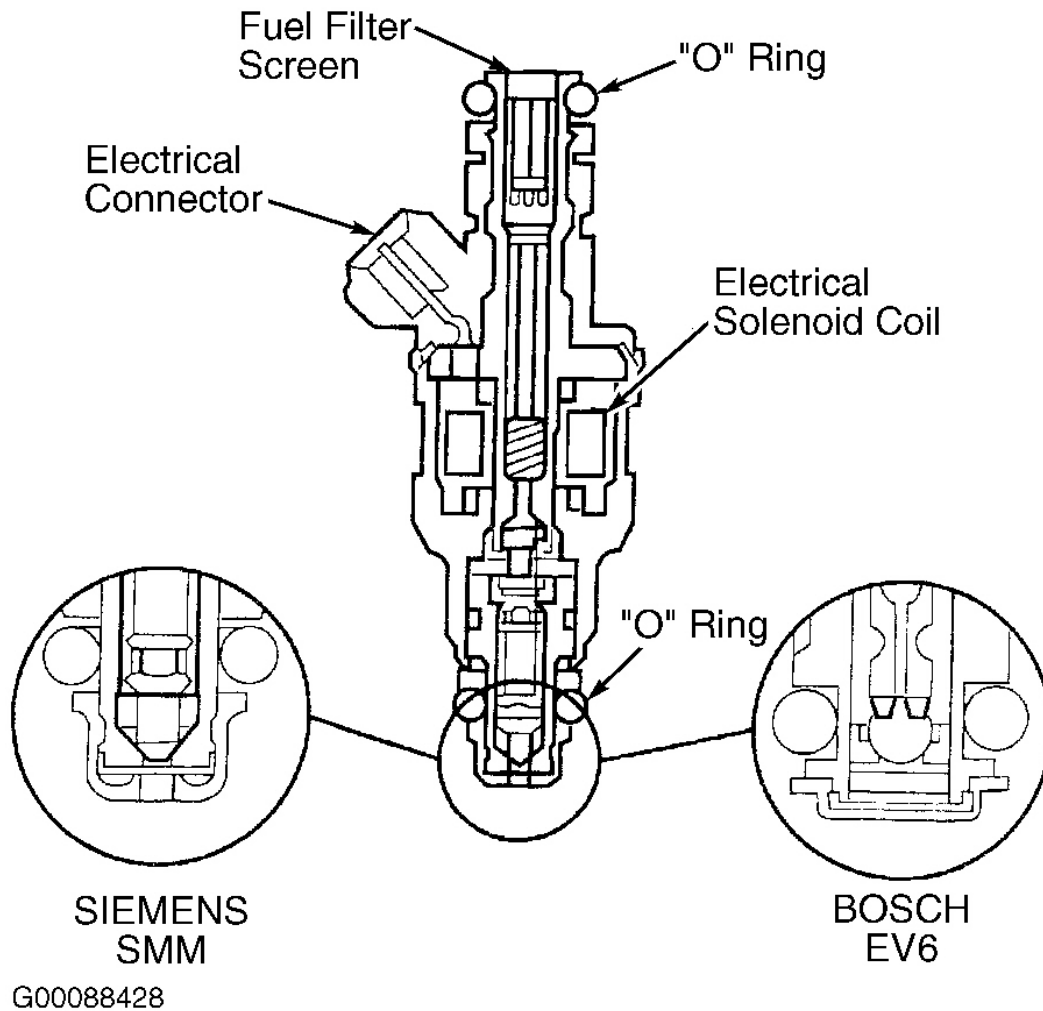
Cross-Sectional View Of Fuel Injector Assembly
